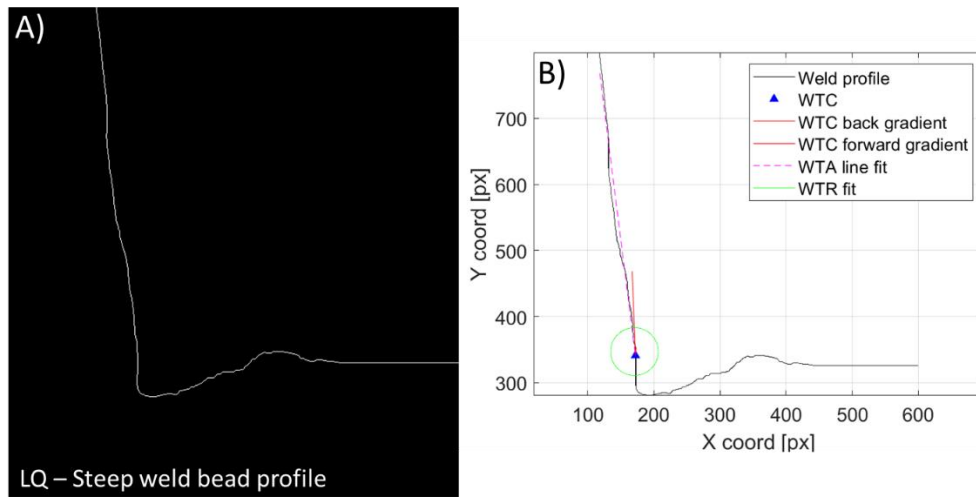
LQ steep weld bead profile - A) original single-pixel weld bead profile; B) weld toe geometry extraction after MATLAB processing.
